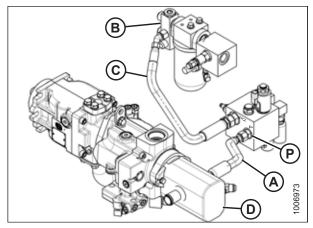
M150/M200 Configuration after Installing the DWA Drive Manifold
